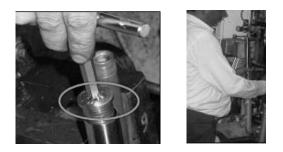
A typical photograph of cylinder bottom valve assembly event at traditional and semi-ergonomic shocker assembly line
